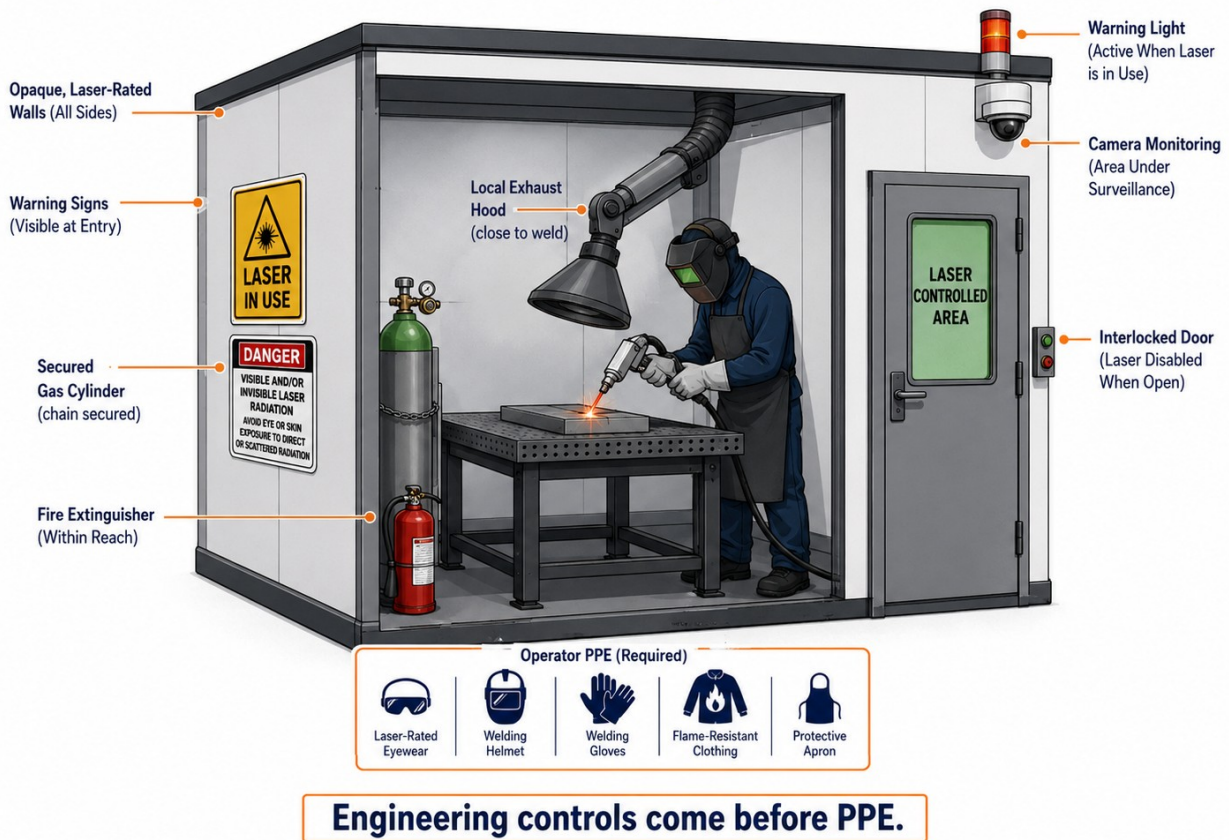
Example of a controlled handheld laser welding area with access control, extraction, monitoring, and operator PPE.
